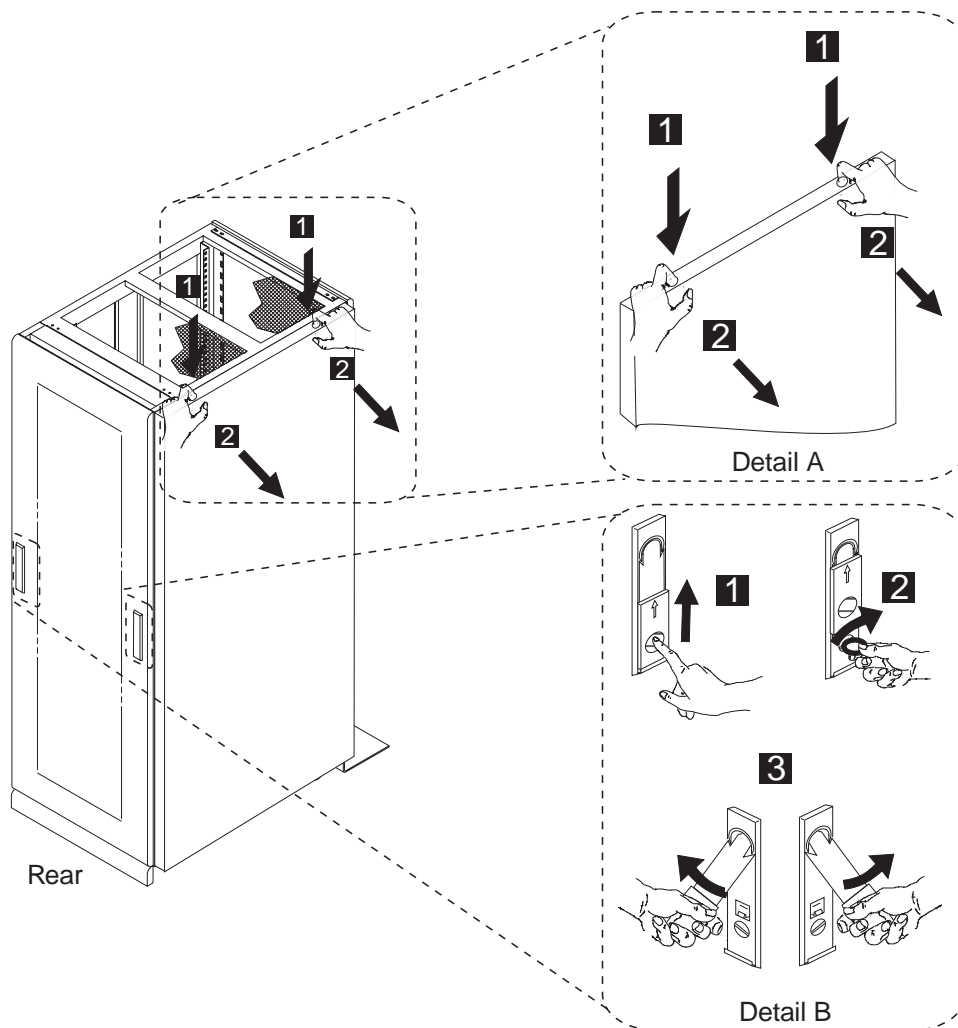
Front, Rear Door And Side Cover Latches in 37 U Rack
